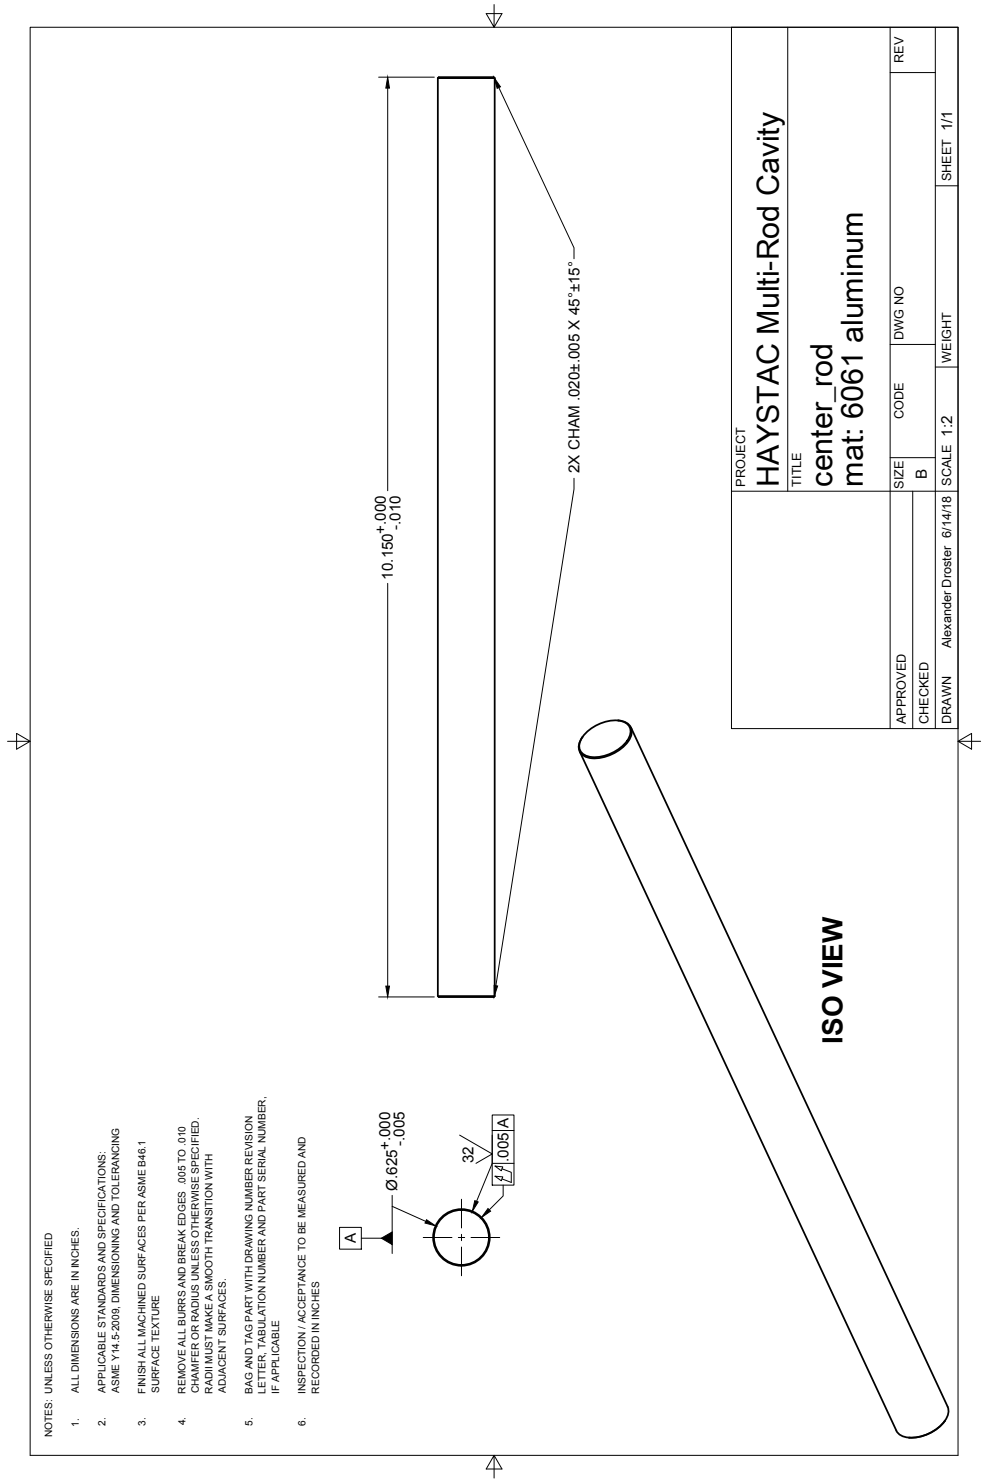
CAD drawing of the central rod in the seven-rod cavity.
